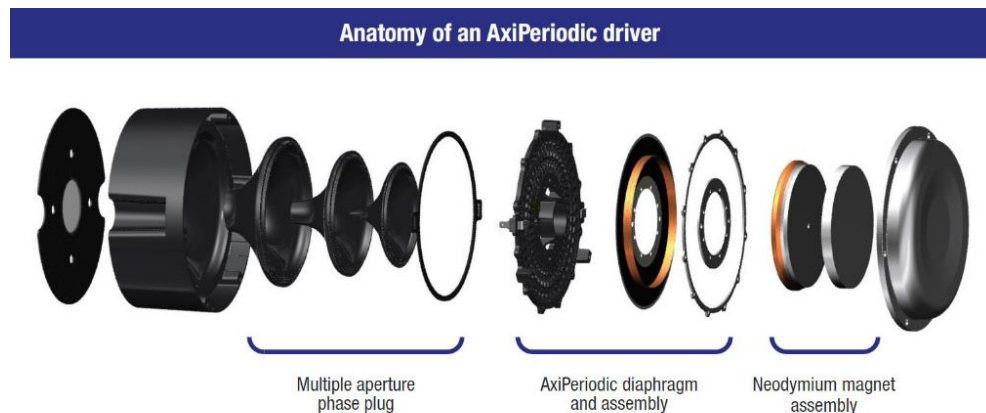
Exploded view of the Celestion Axi2050 2" compression driver
